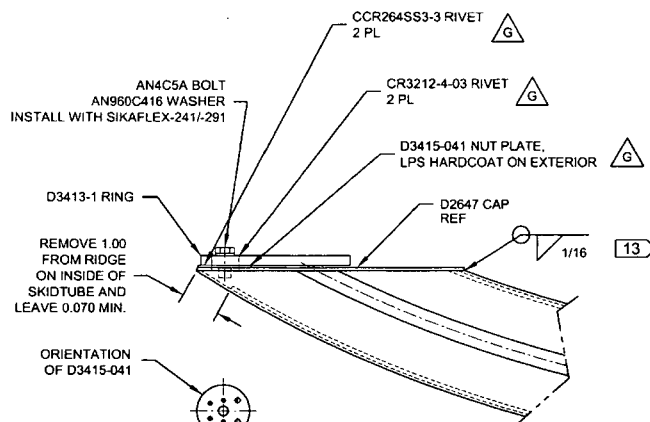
DETAIL A: DRILL DETAIL D6-2, D4-2
